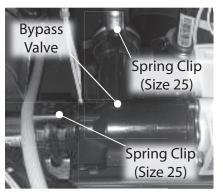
Spring Clips (Size 25), Bypass Valve (B2)
